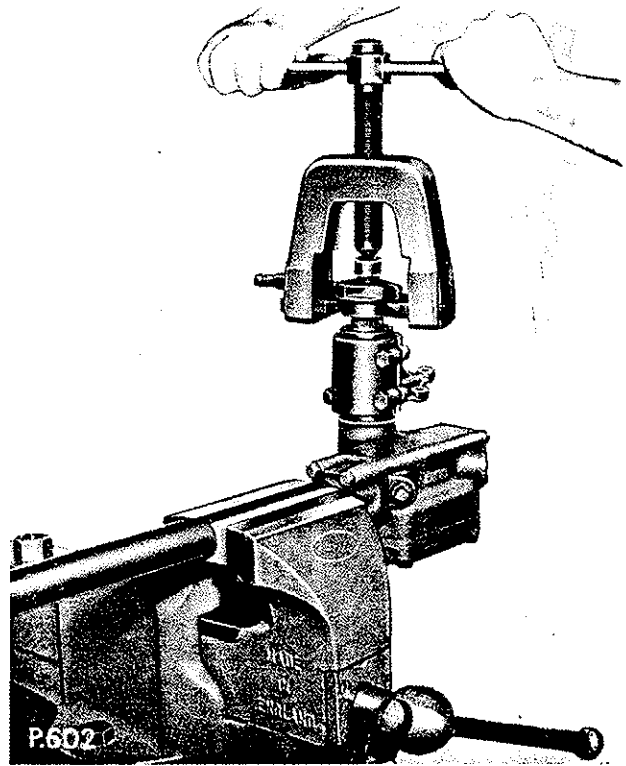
Removing the drop arm using Churchill Tool R.G.59A with Churchill Thrust Pad R.G.59A-1
